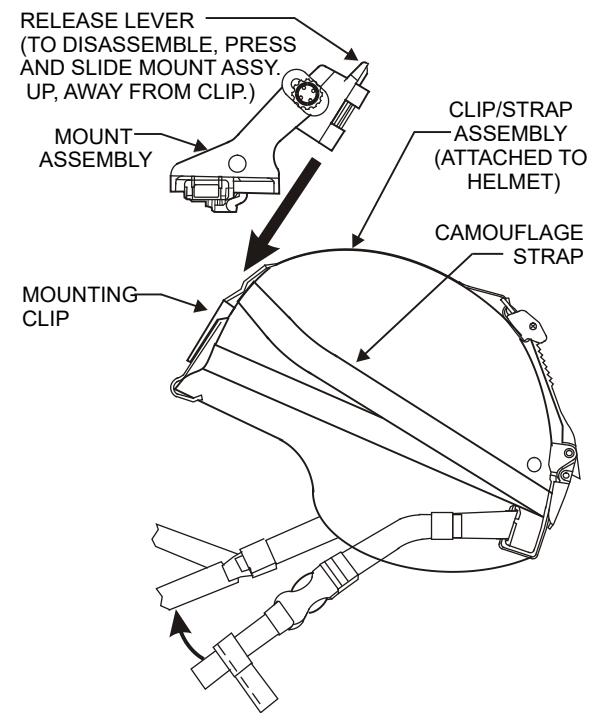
Attaching the Mount Assembly to the Clip/Strap Assembly.
